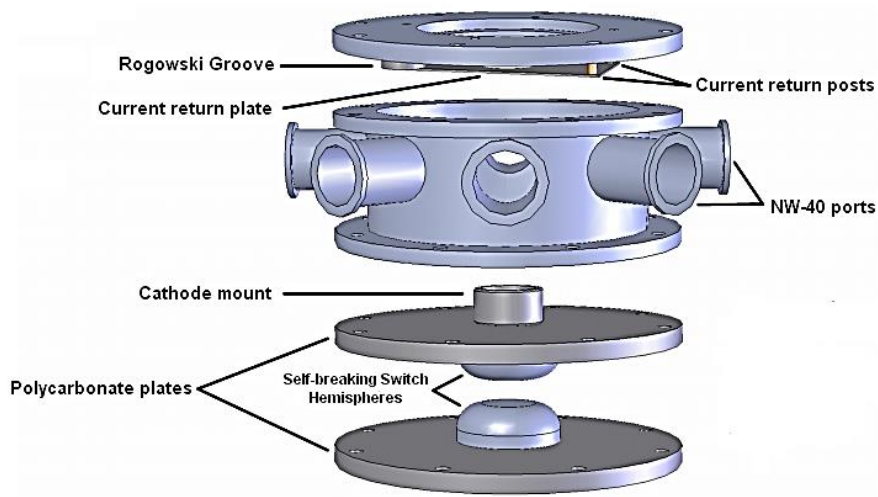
The gas switch and vacuum chamber in exploded view (32).
